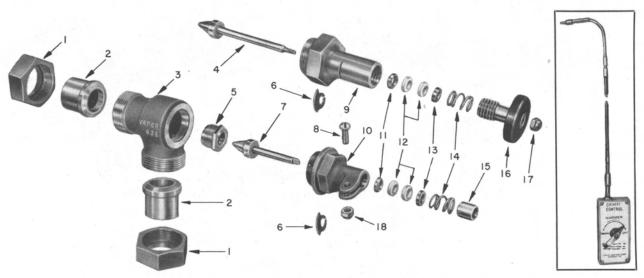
Exploded View of No. 938 Type Valves and View of Remote Control Mechanism
